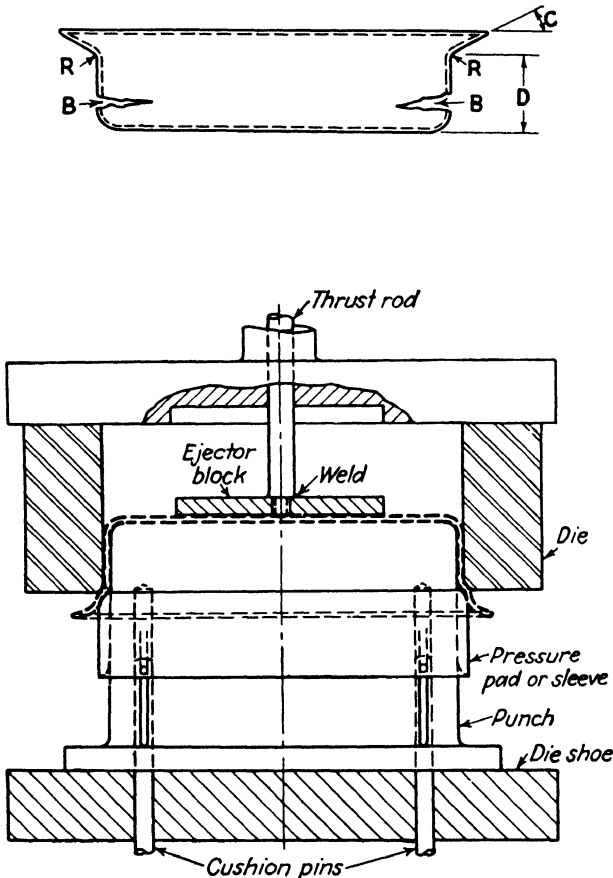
An inverted die for the second draw of the shell shown in Fig. 168. At *B* are seen ruptures and other faults that may occur when drawing or redrawing the shell.
